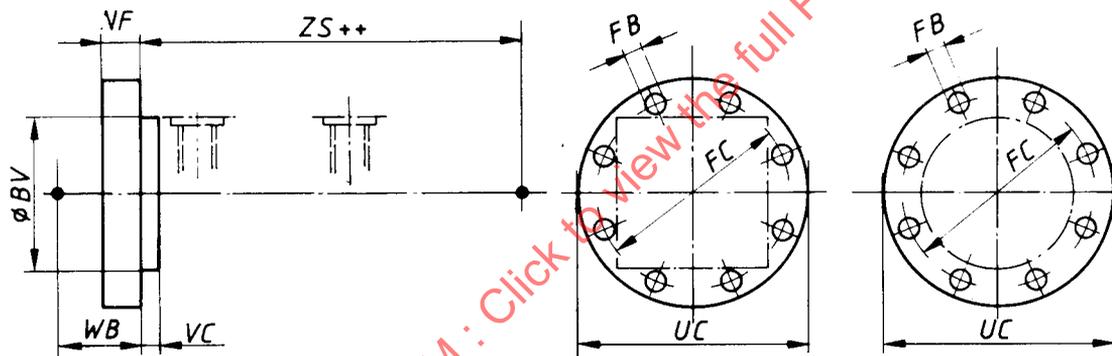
(MDF 7) Head circular flange centred on the rearside — Double rod
